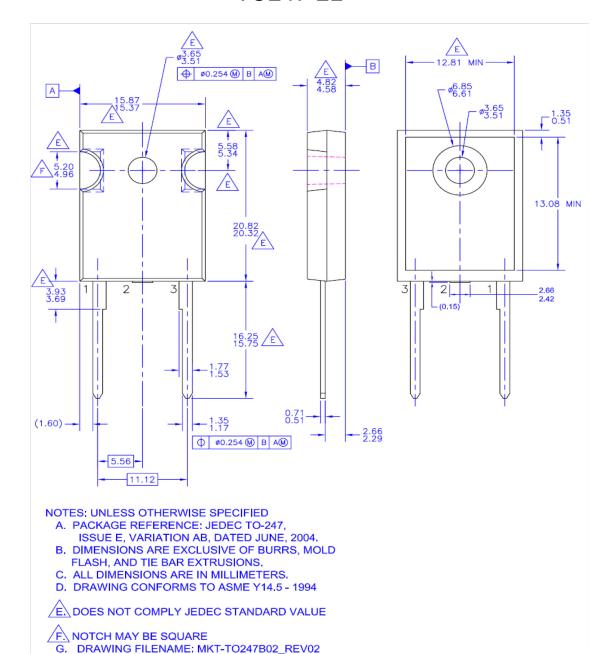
TO-247, Molded, 2LD, Jedec Option AB
